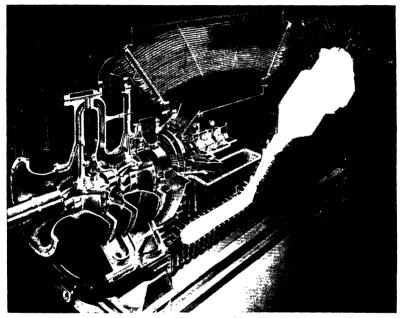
Cutaway view of Elliott gas-turbine plant for locomotive drive.
